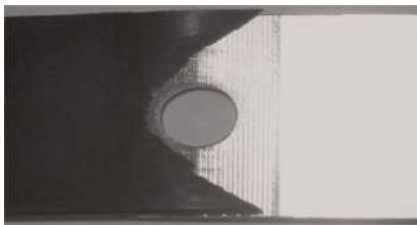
Fracture behavior of 5 mm hole geometry with untreated surface
